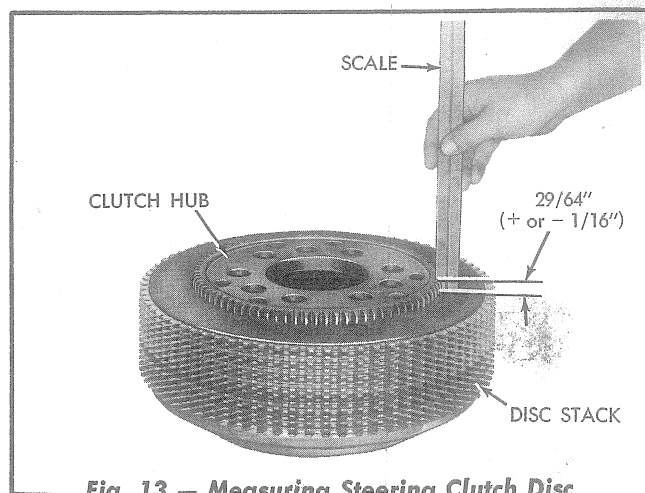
Measuring Steering Clutch Disc Stack Height
